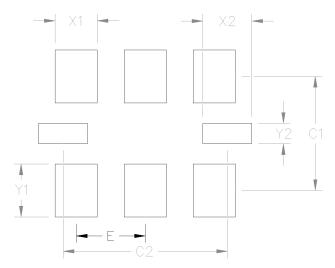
Si567 (5x7 mm) PCB Land Pattern
